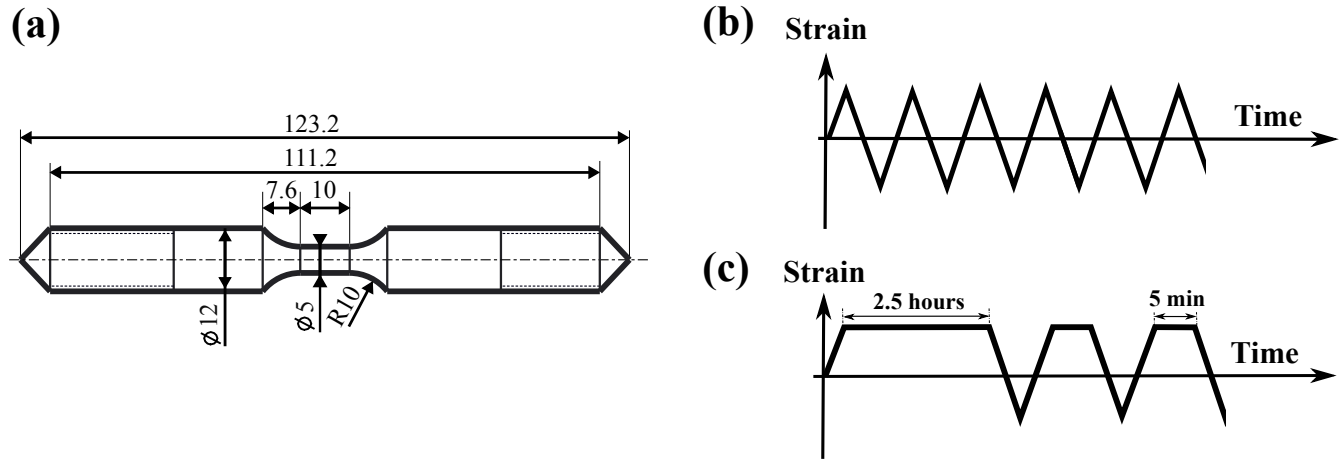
(a) Dimensions of the uniaxial round bar specimen (all measures given in mm). Schematic waveforms employed for (b) fatigue saw-tooth and (c) creep-fatigue dwell-type loading with tensile hold patterns.
